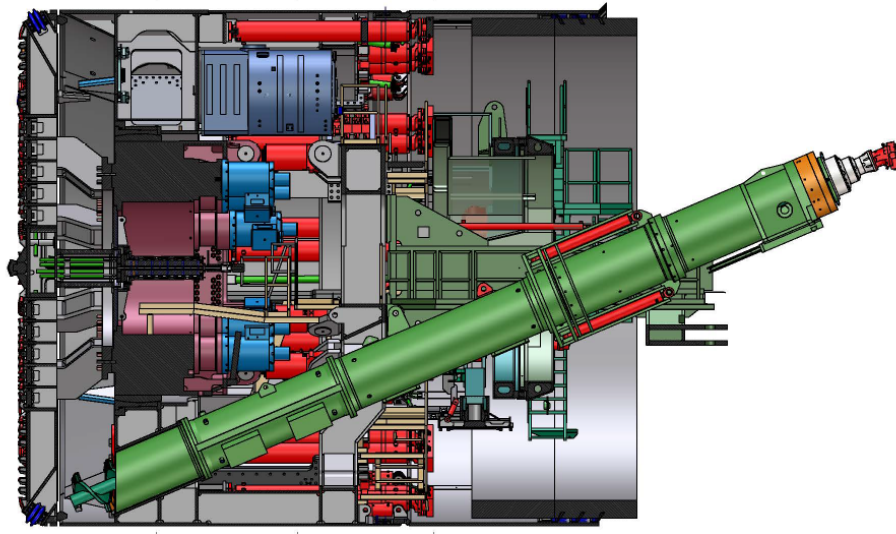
EPB TBM Shield (S-1014, Drawing 4873-000-001-00).
